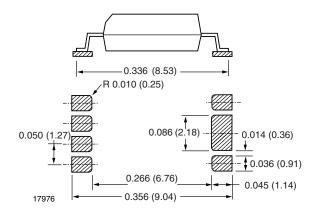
8 Pin PCMCIA, Heat Sink
